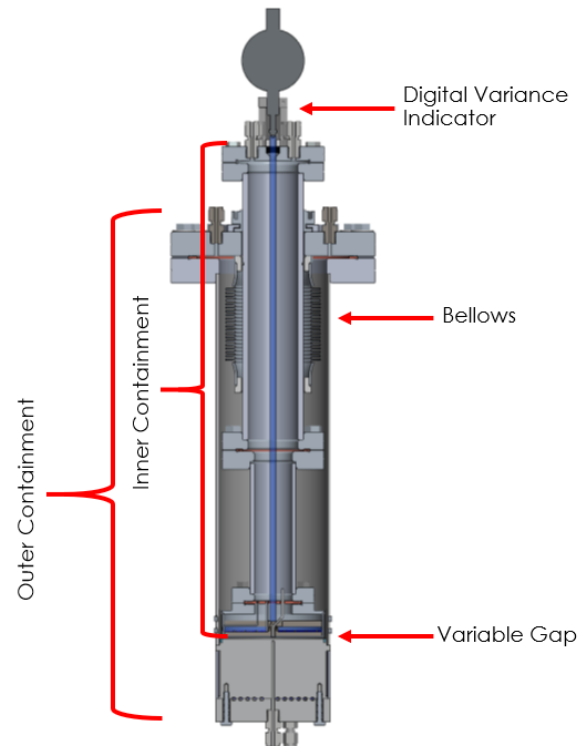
Overall cross-sectional view of the variable gap system, which comprises the inner and outer containments.
